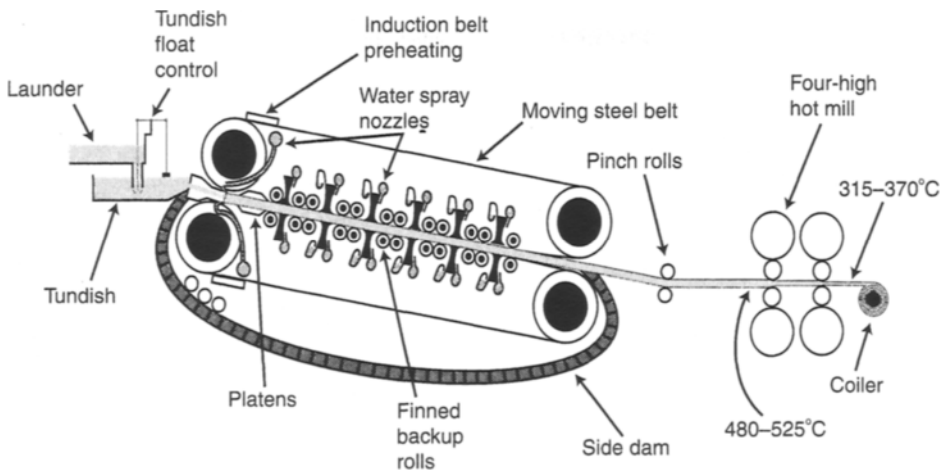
Diagram of Hazlett strip casting machine for nonferrous metals. (Reproduced courtesy of Hazlett Strip-Casting Corp.)
